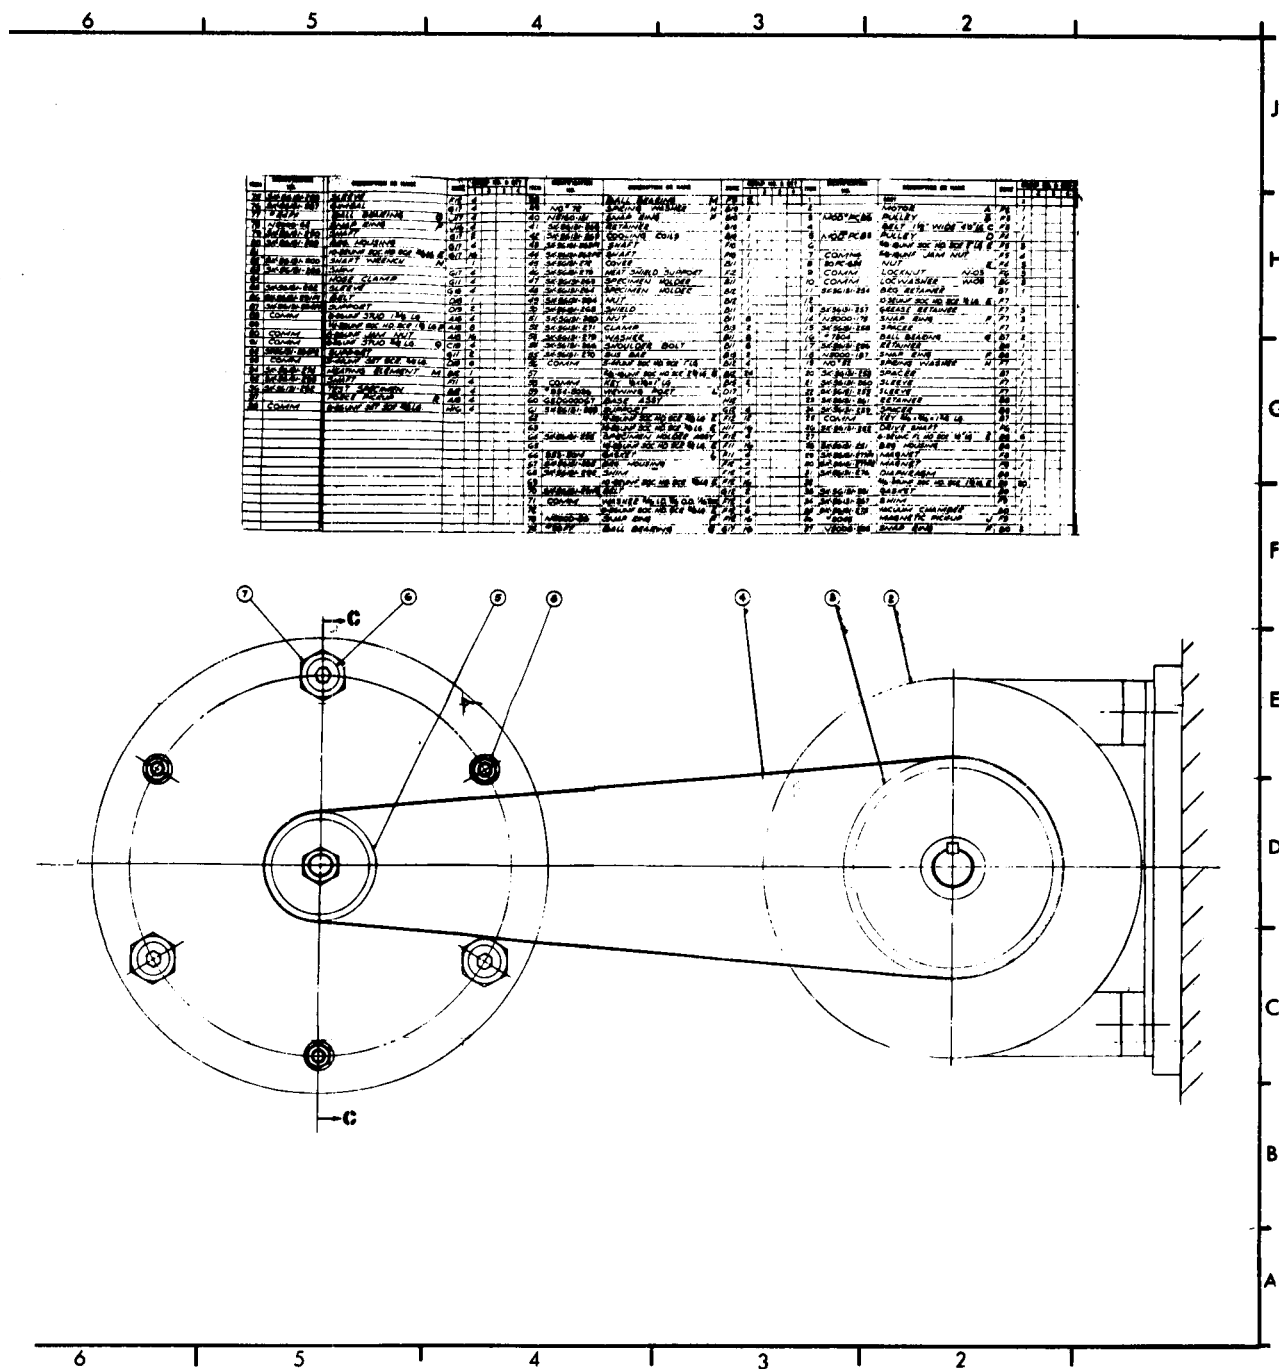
High Vacuum Friction and Wear Tester Assembly Drawing
